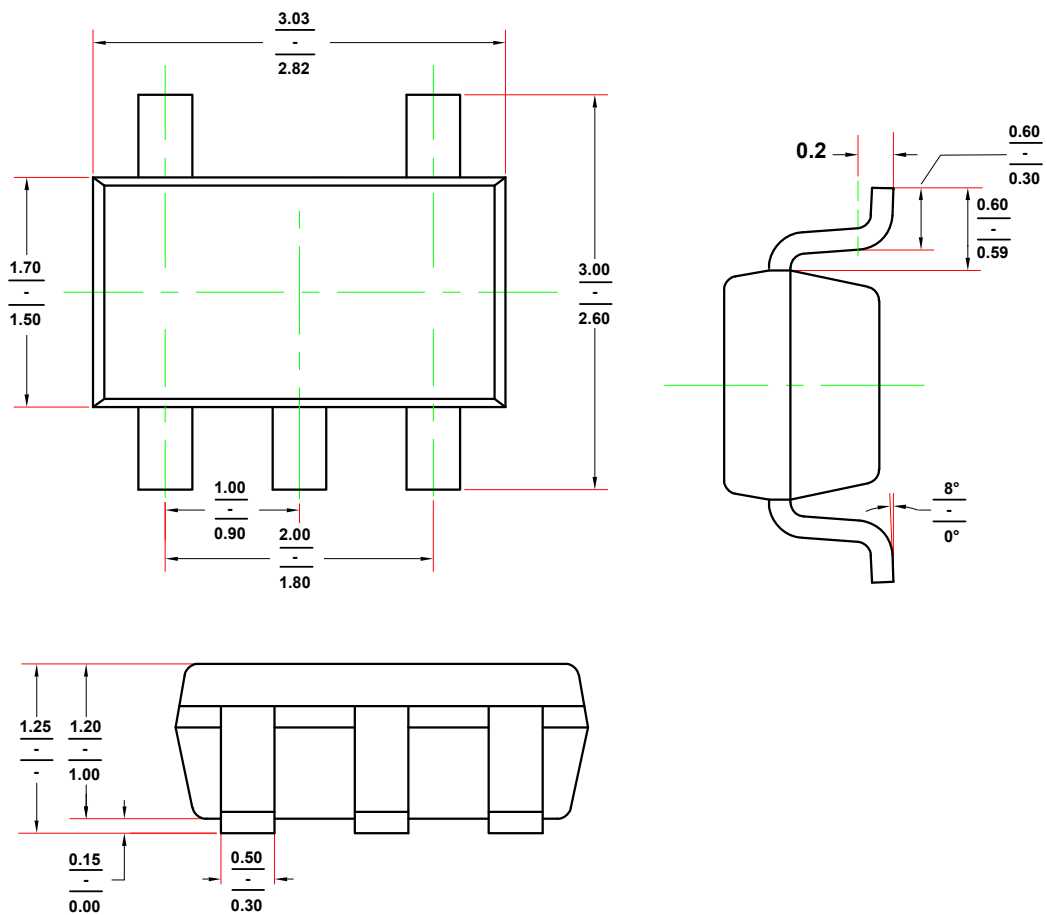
5-Lead SOT23 Package Dimensions shown in millimeters
